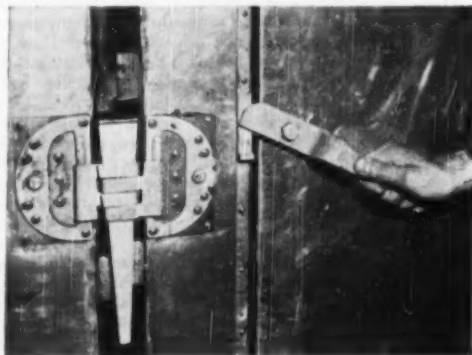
DETAIL OF CONNECTOR PIN AND LATCH ON ESCAPE DOOR
